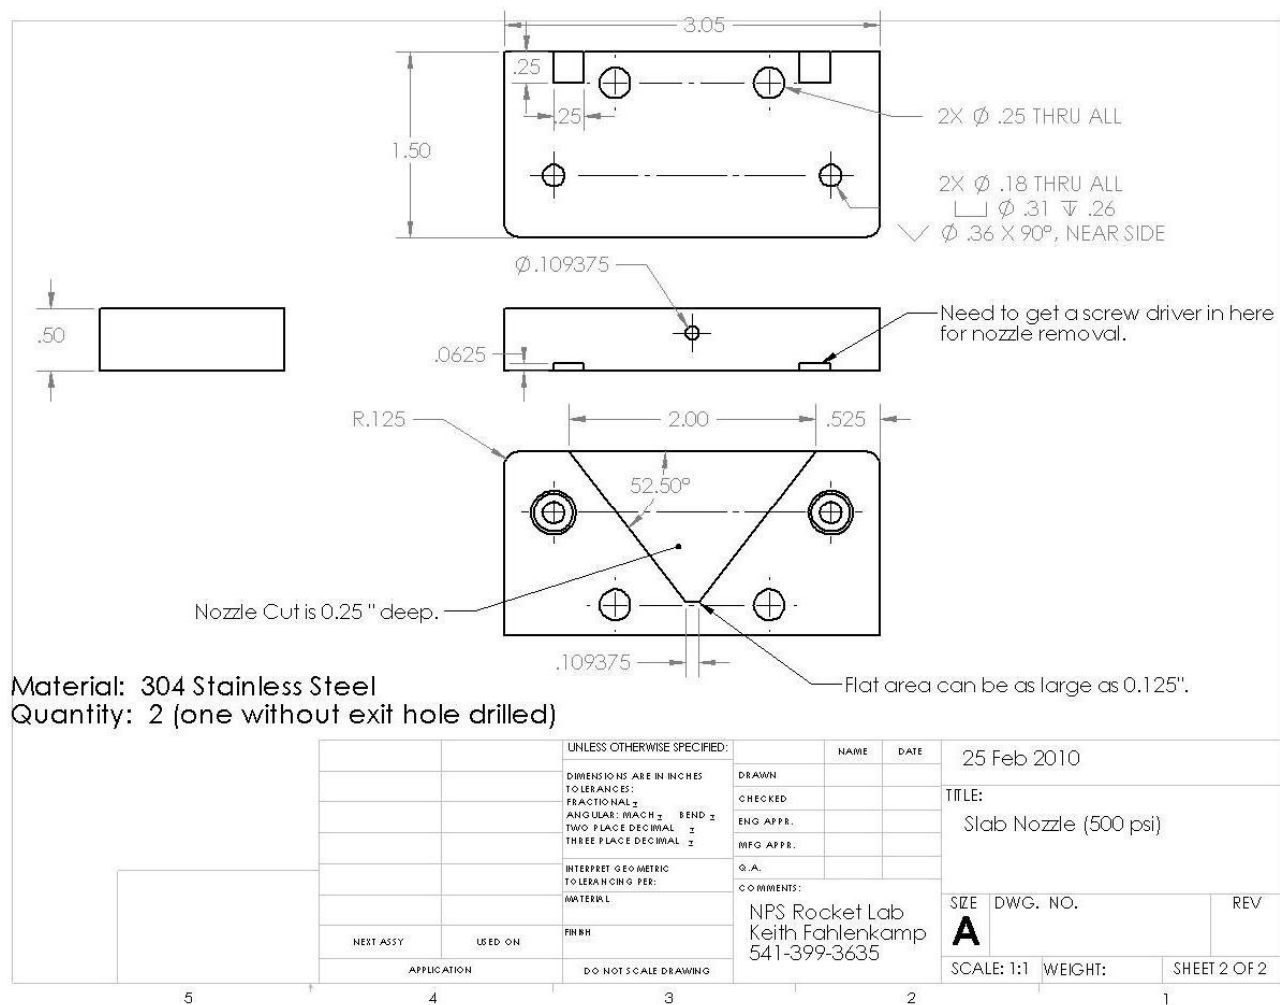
Flat Burner Nozzle Sheet 2 of 2
